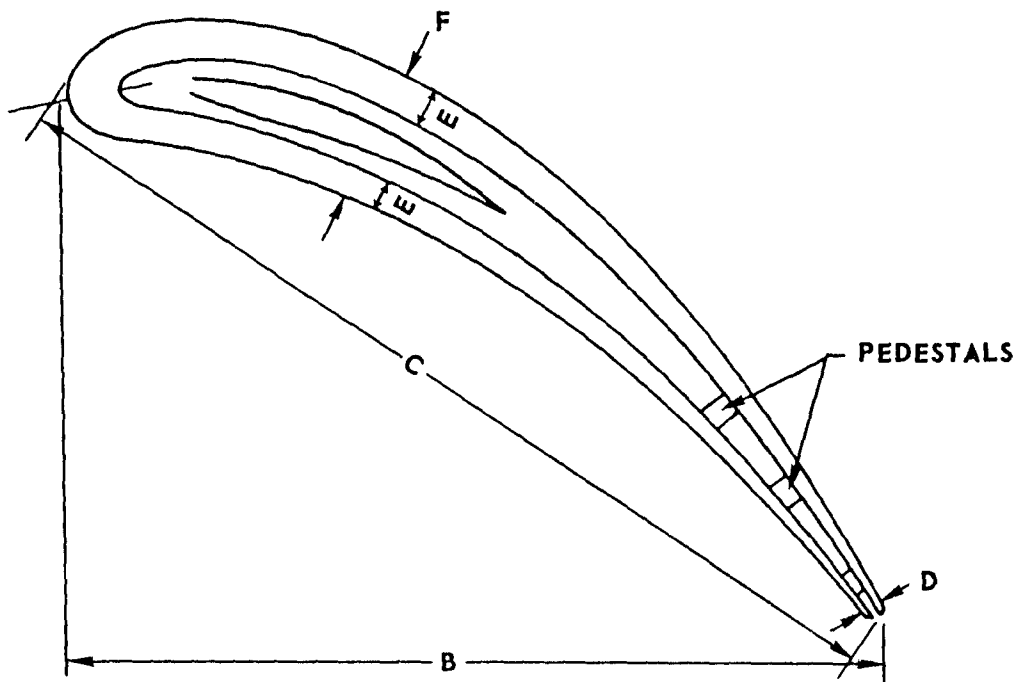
ILLUSTRATION OF TYPICAL IMPINGEMENT-COOLED TURBINE BLADE DRAWINGS SENT TO BLADE MANUFACTURERS
